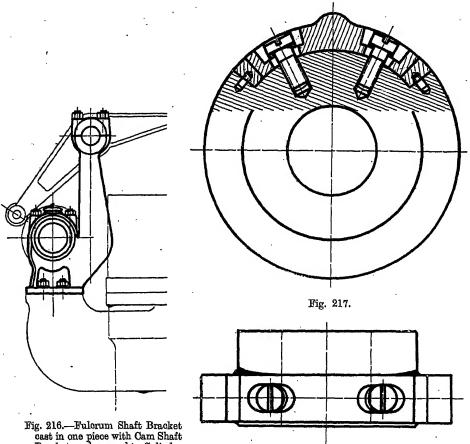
Fullorum Shaft Bracket cast in one piece with Cam Shaft Bracket, and secured to Cylinder Jacket instead of Head.
